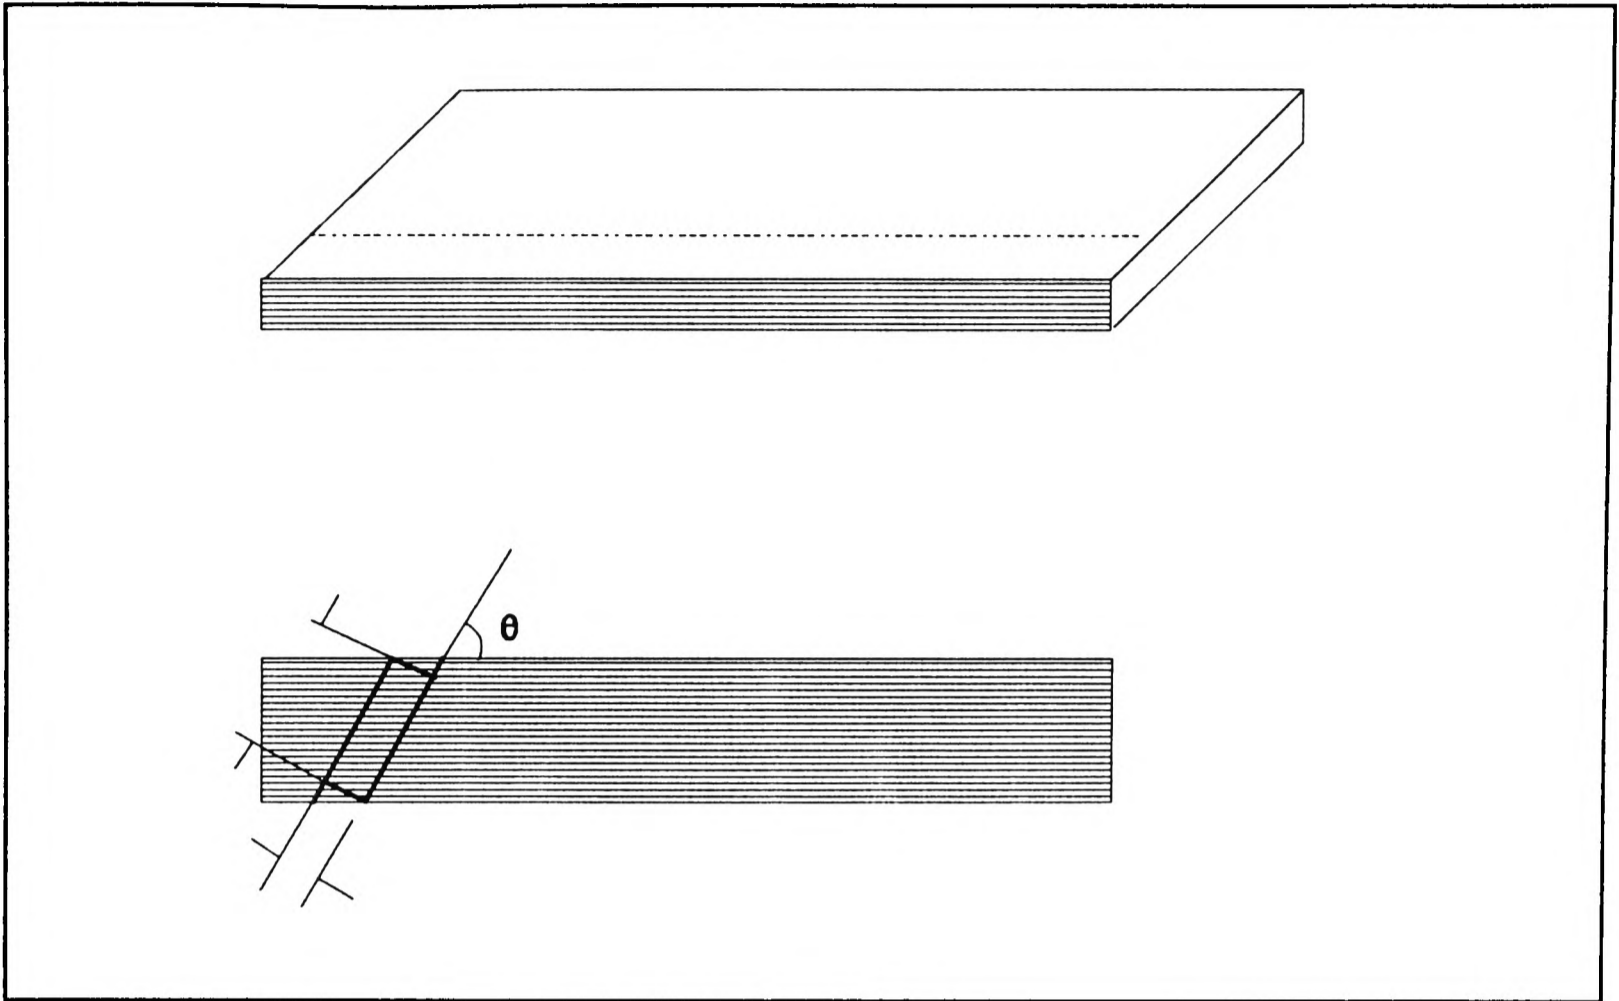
Uniaxial oblique specimen cutting from thick plate.
